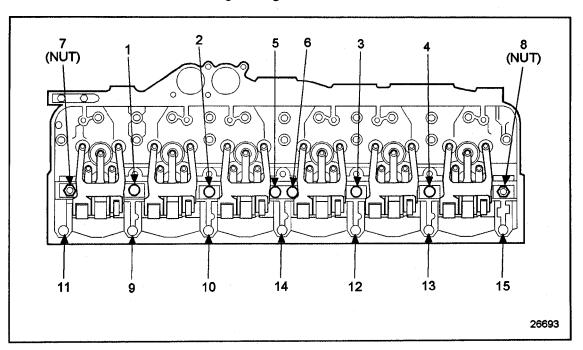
Camshaft Cap Bolts and Rocker Arm Shaft Nut Torque Sequence
